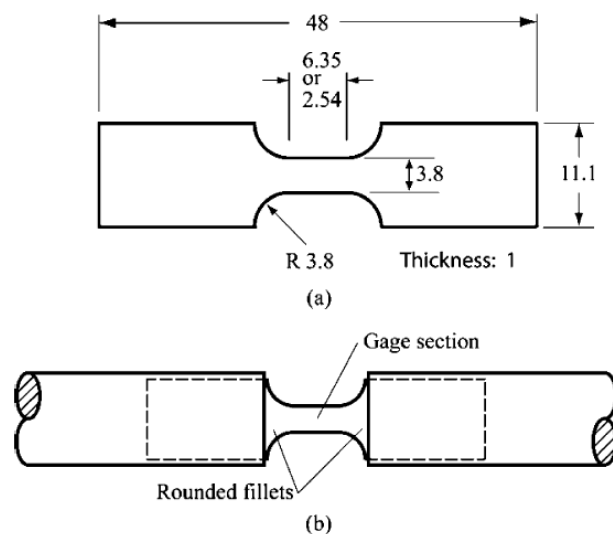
Tensile specimen (a) and its positioning at SHPB (b) [129]
